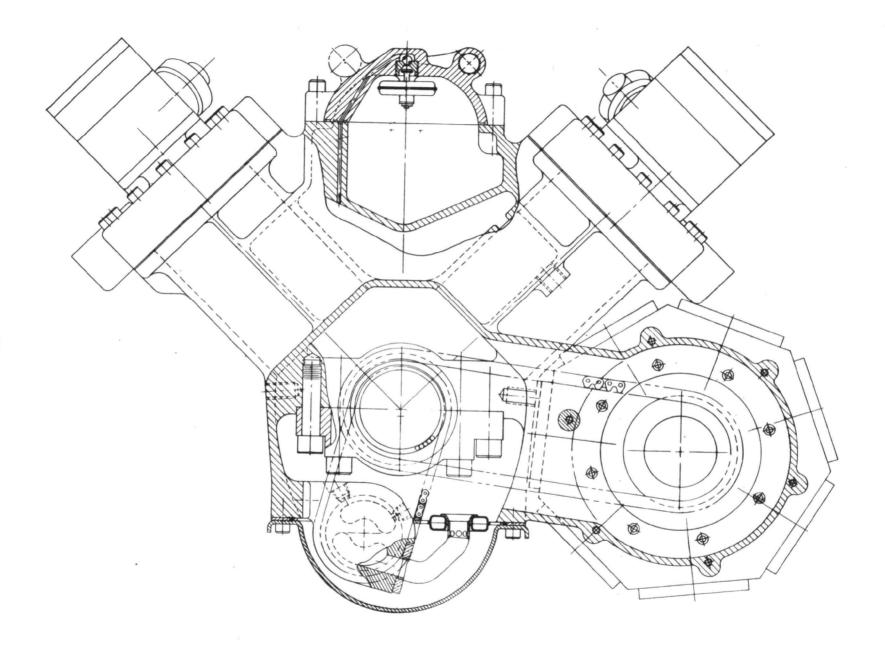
Expander Layout with American Bosch Valving - Cross Section Through Rear of Expander Showing Feedpump and Oil Pump Drive.
